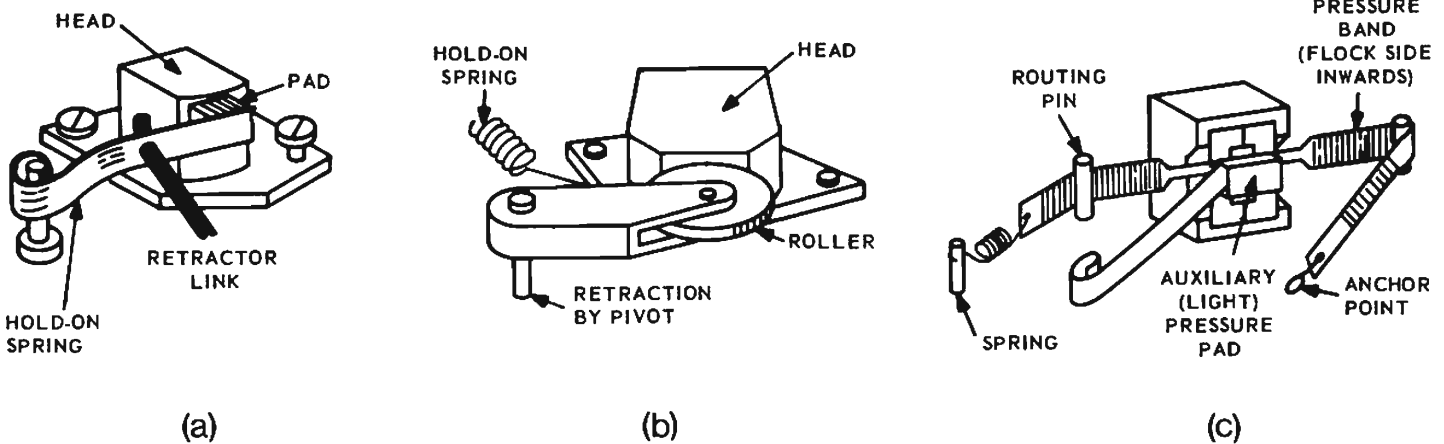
Three methods of maintaining good contact of tape to head (a) pressure pad on spring arm, (b) pressure roller, and (c) felted band which gives a greater degree of wrap.
